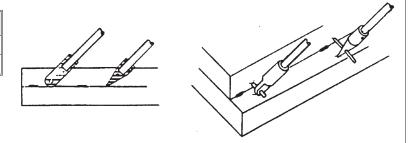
TIP SELECTION, TACK WELD FILLET
